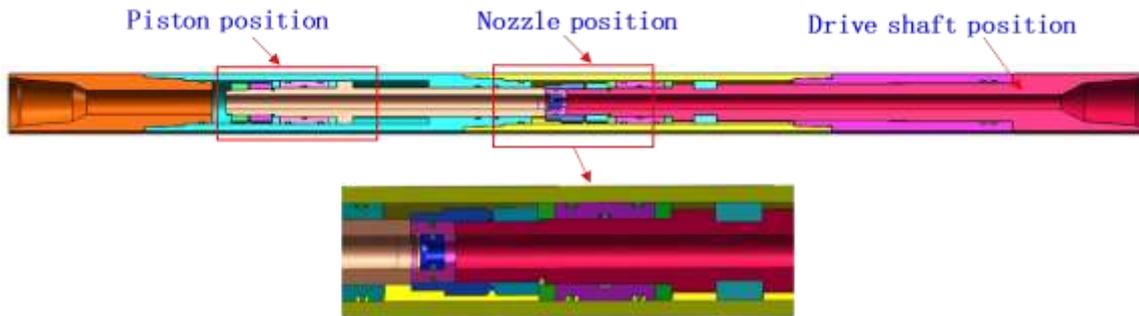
The whole and partial enlarged drawing of hydraulic thruster
